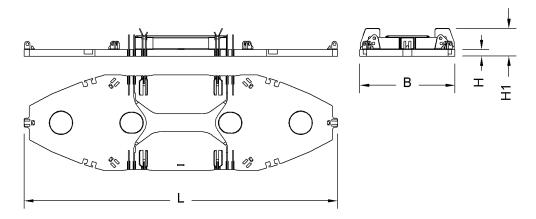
Dimensions of basic counterweight slab 31,085 lb
